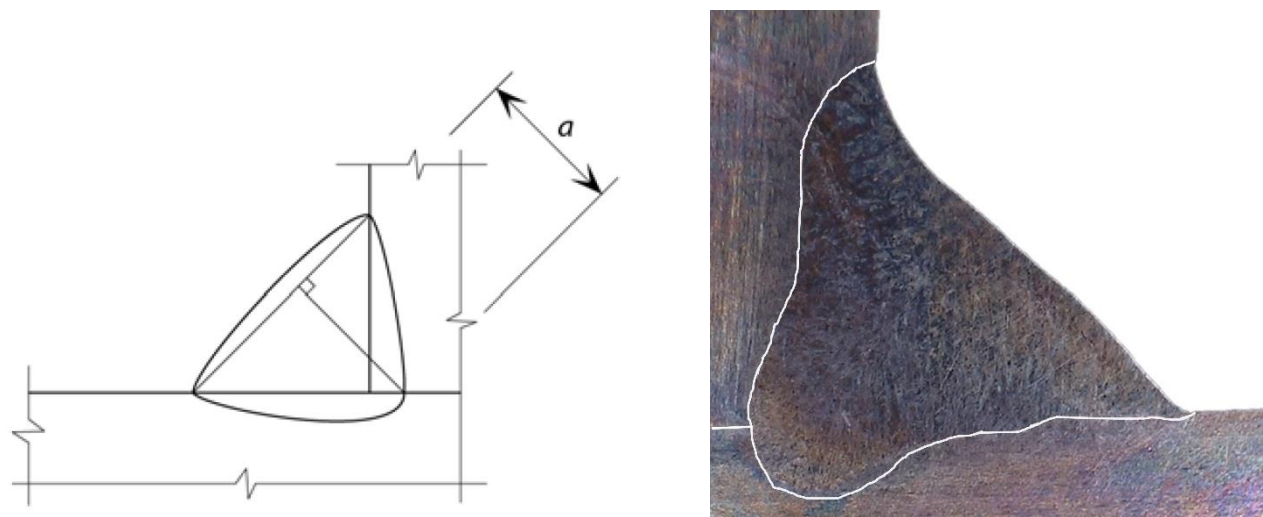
Throat thickness a for a deep penetration fillet weld (left) and the macroscopic examination of the weld in EN 1.4062 (right).
